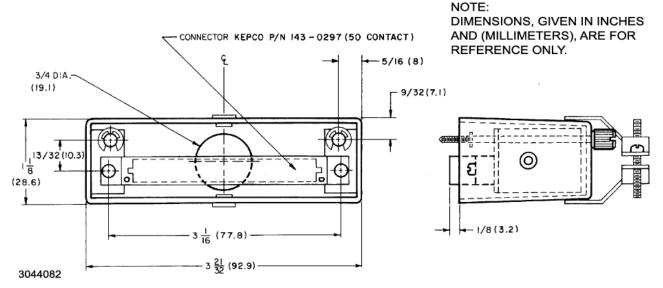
MECHANICAL OUTLINE DRAWING, MODEL PC 15
